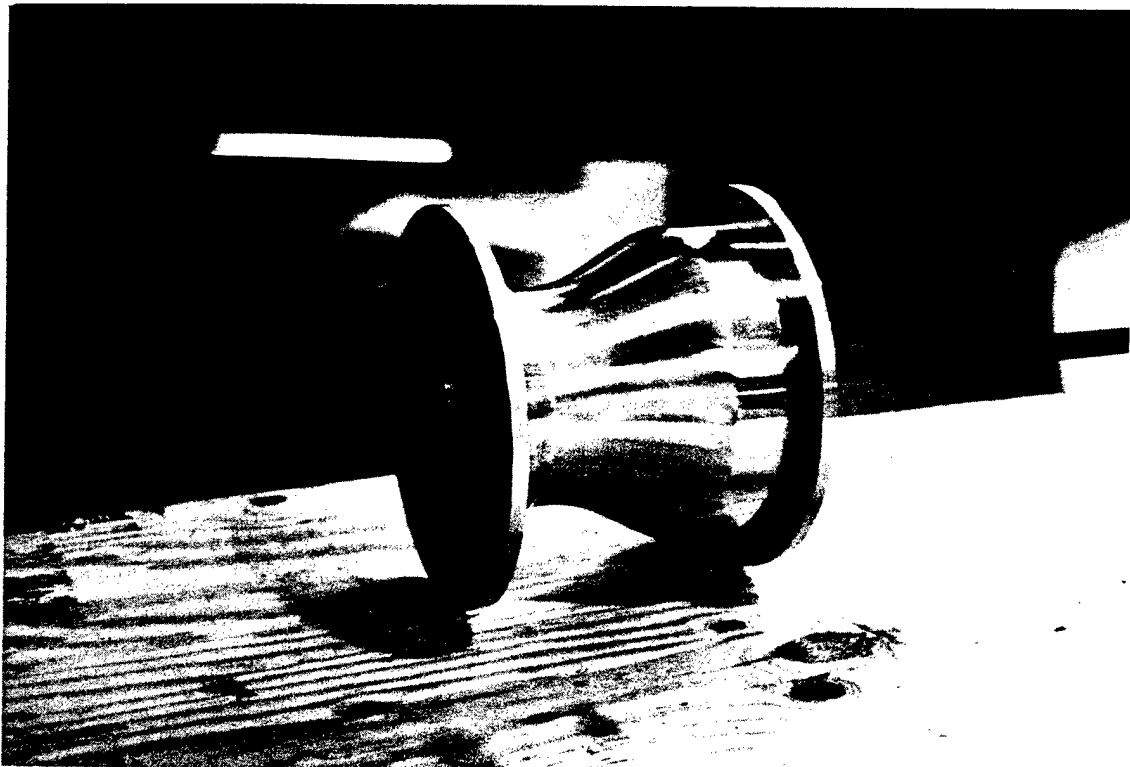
Photograph of the assembled mold used to fabricate a composite suction bell.
